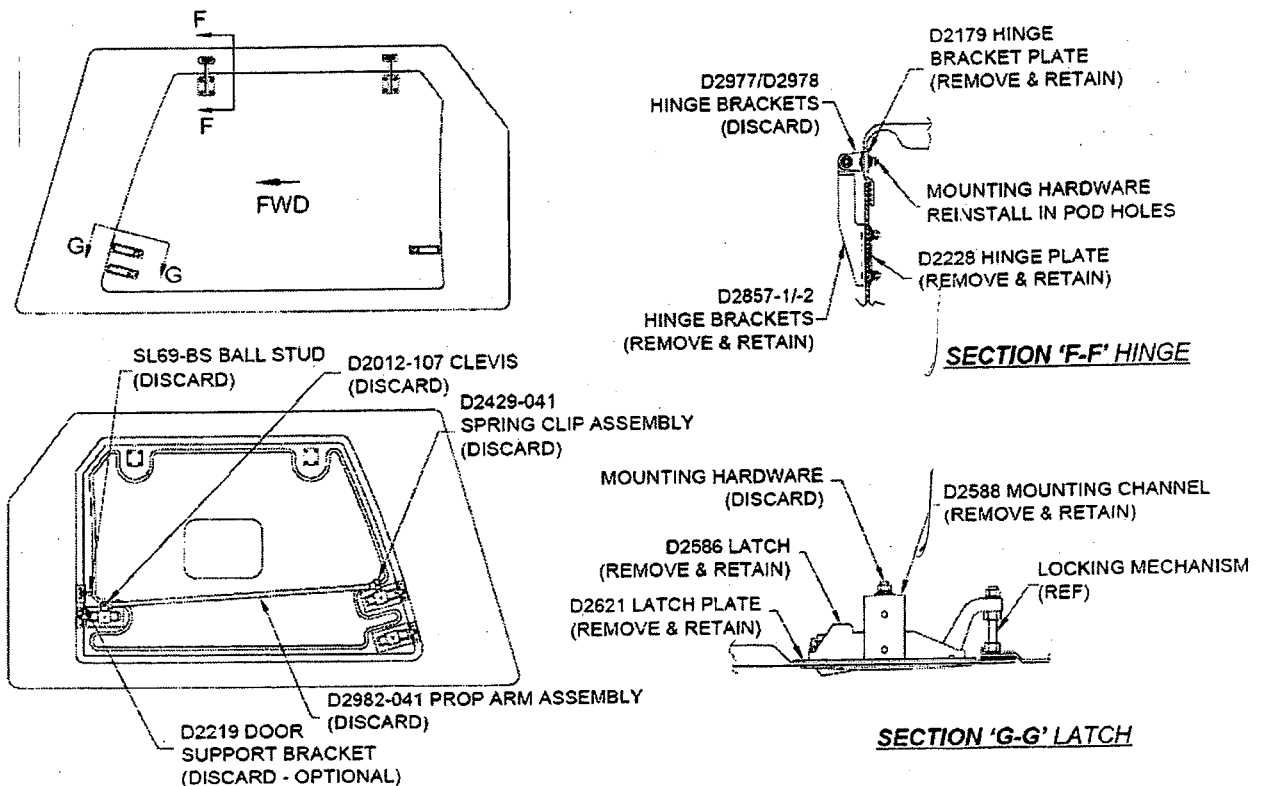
COMPONENT REMOVAL FROM EXISTING SPACEPOD™ KIT
